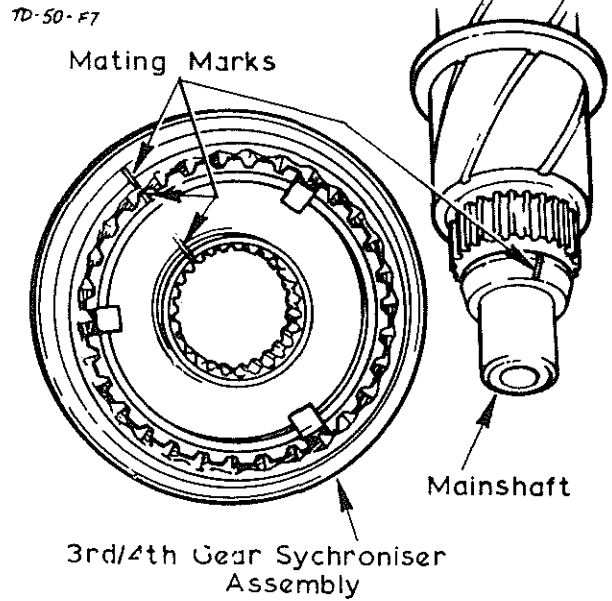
MATING MARKS BETWEEN MAINSHAFT AND SYNCHRONISER
